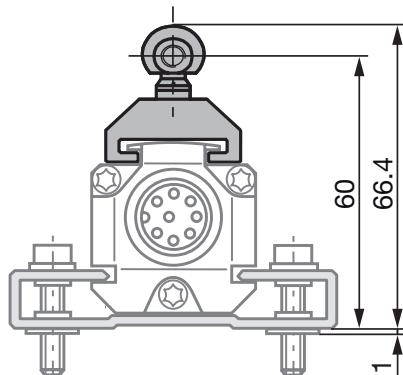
Dimensions and distances with BTL5-F-2814-1S magnet
